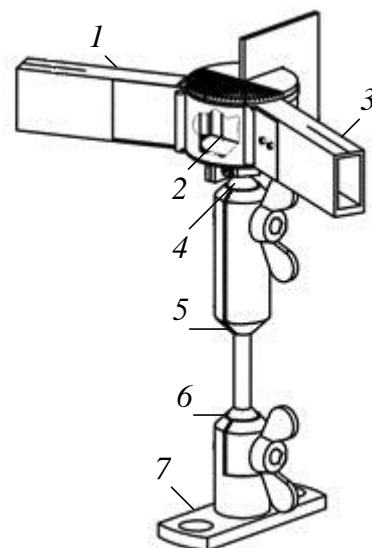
Mirror holder: 1, 3 – beam guides; 2 – mirror; 4–6 – hinged clamps; 7 – mounting pad.
